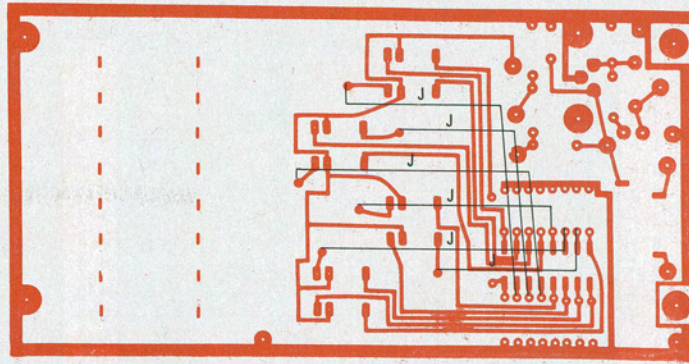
RUN SIX JUMPERS between the zero-insertion-force test socket and the appropriate pads on the component-side of the board.
